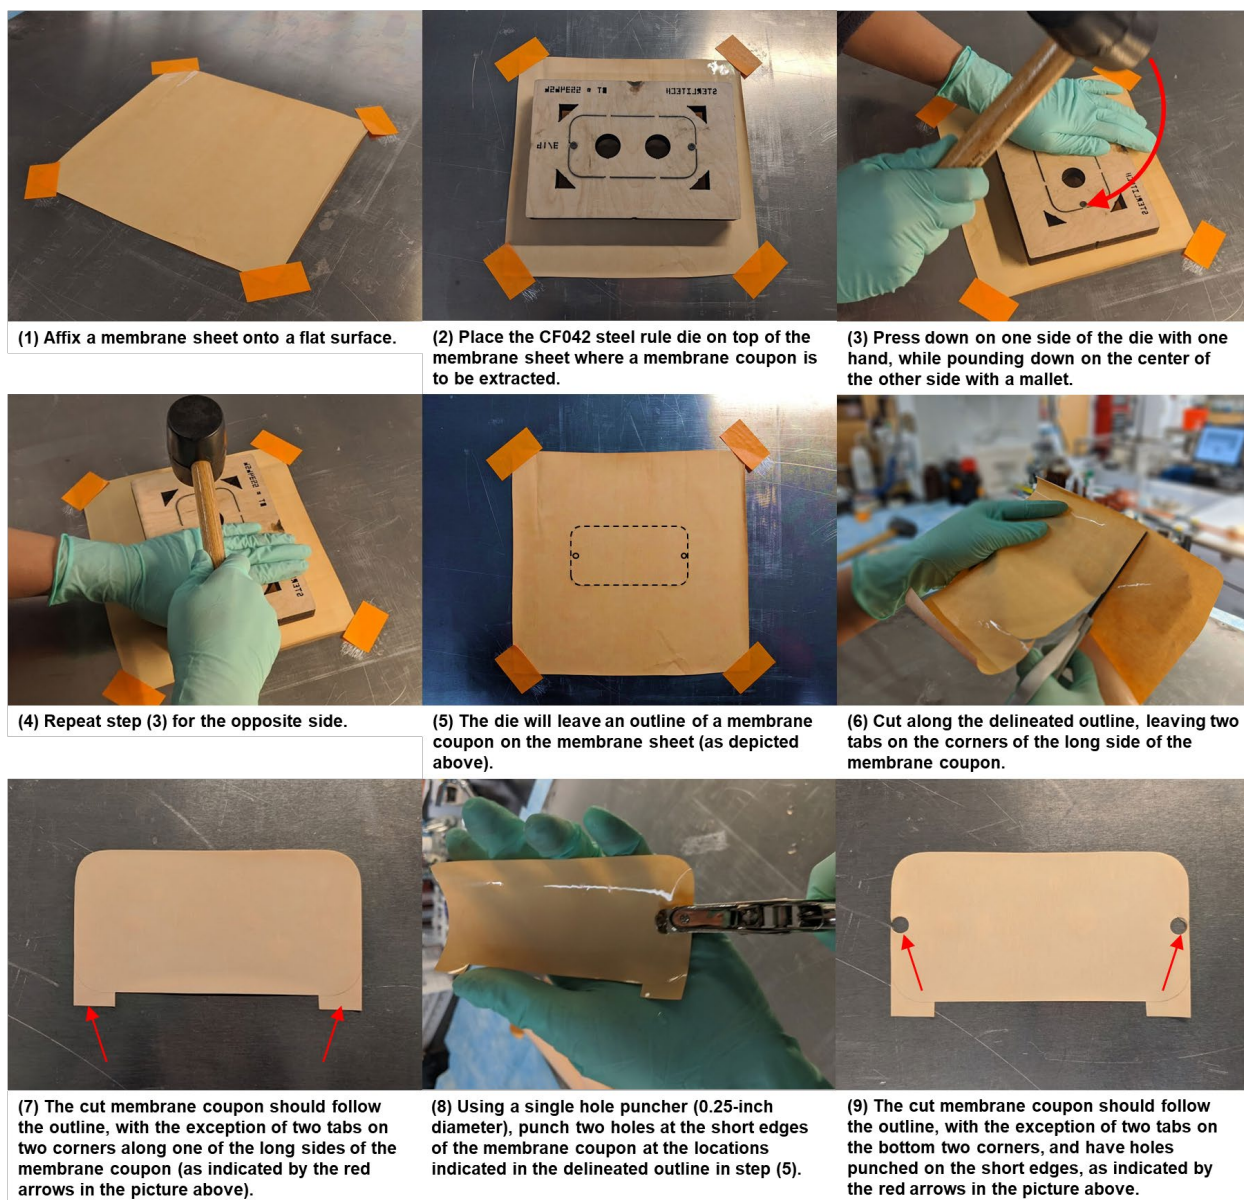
Steps to extract a 4" x 2" membrane coupon from a flat sheet membrane using a CF042 steel rule die (It is noted that step (7) was omitted for the membrane coupons extracted to test uniformity of the SNS-PAA-PA membrane sheet in Chapter 6).
